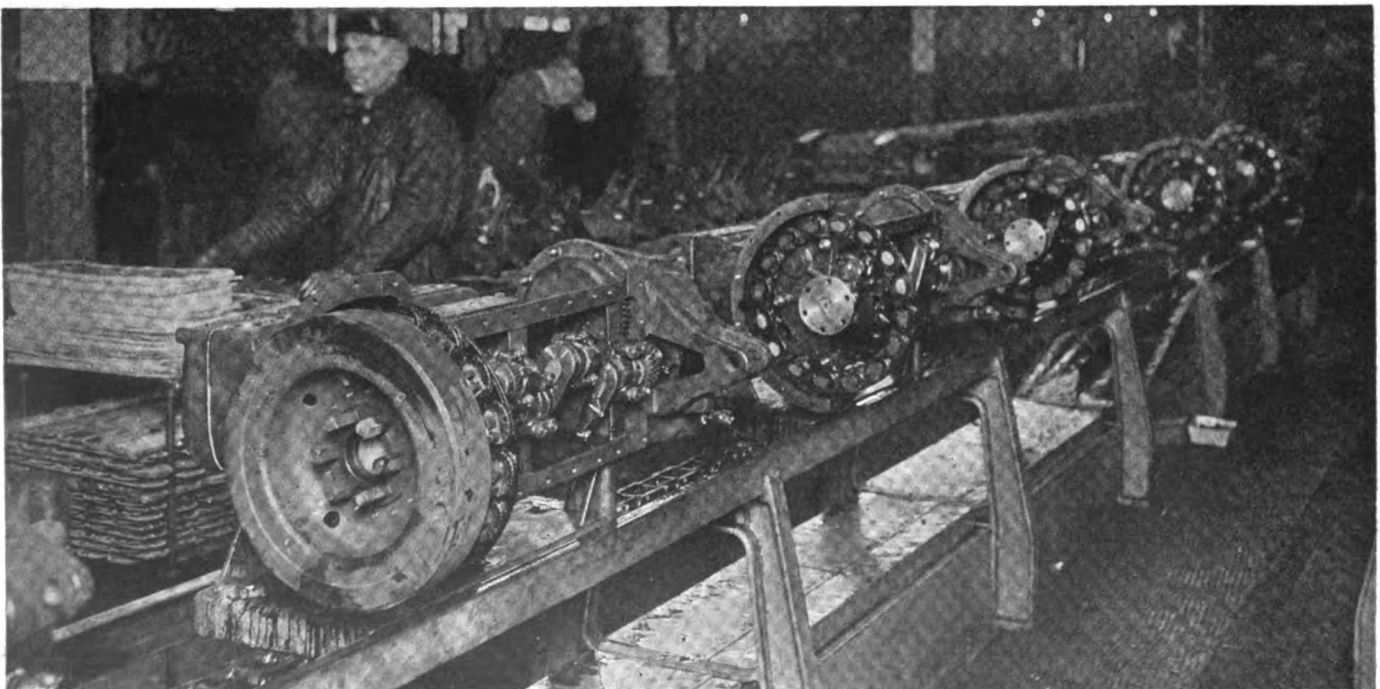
Cylinder blocks coming along chain ready to have the field plates with the field coils bolted upon them; after which they are ready for the magnetos
